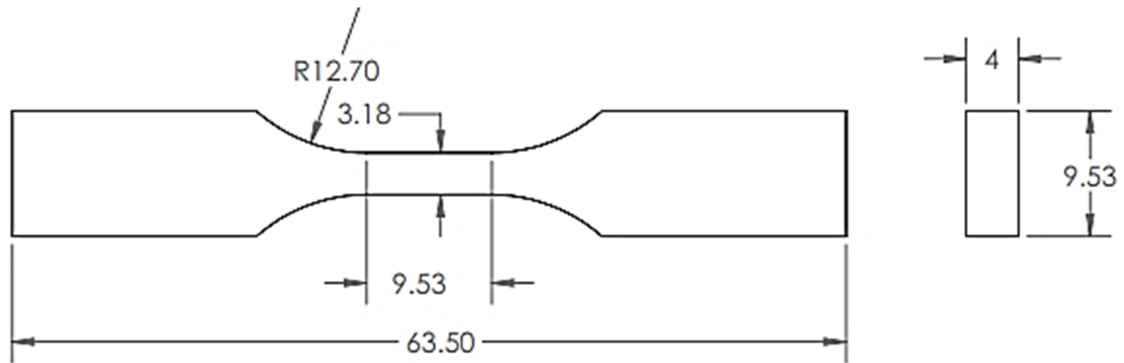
Tensile test specimen, type V geometry (ASTM D638) (Unit: mm)
